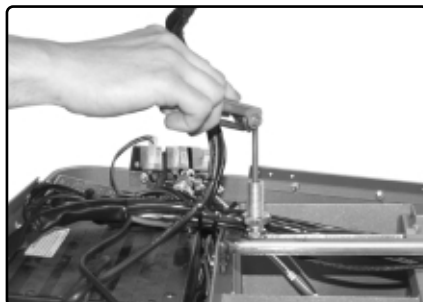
The height adjustment of the threaded socket is secured using the lock screw
